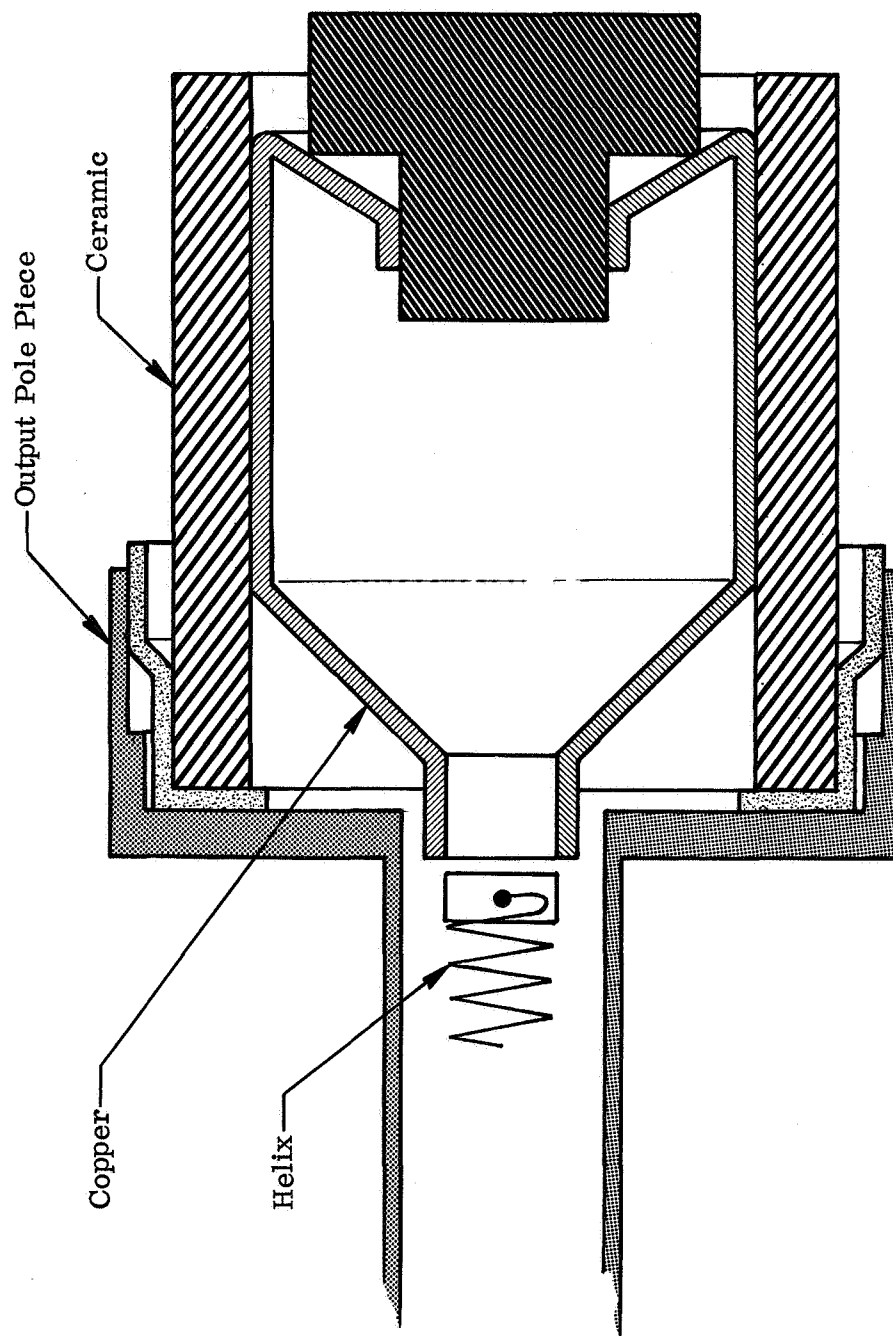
Sketch of the mechanical design of the collector for the WJ-395 TWT.
